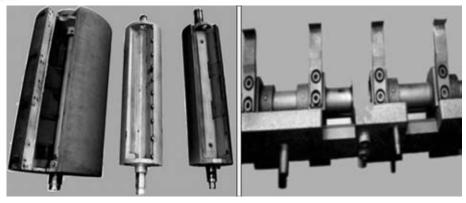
Reconditioned parts of sheet-drawing system of printing machine
